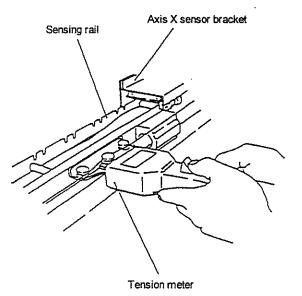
Tension Measurement of Driving Wire (Axis X)
